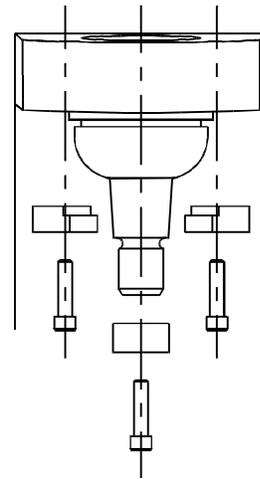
Press-In Mount Upper Ball Joint Retainer Clips
